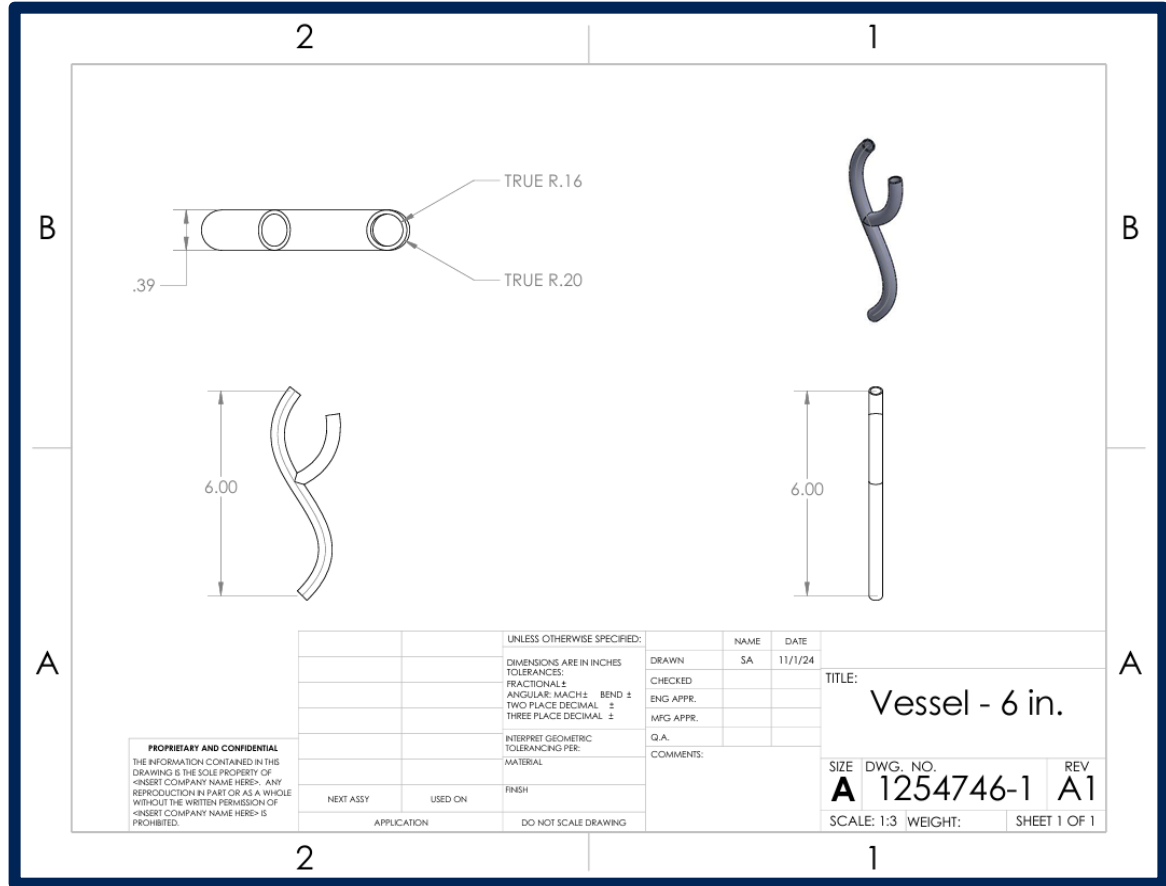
Drawing of Component [PN: 1254746-1 \_6 in. Vessel]
